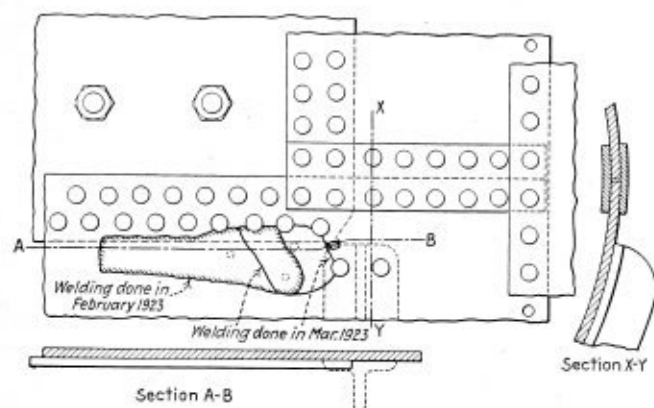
Details of Patch on Boiler Which Failed Due to Corrosion of Plate
